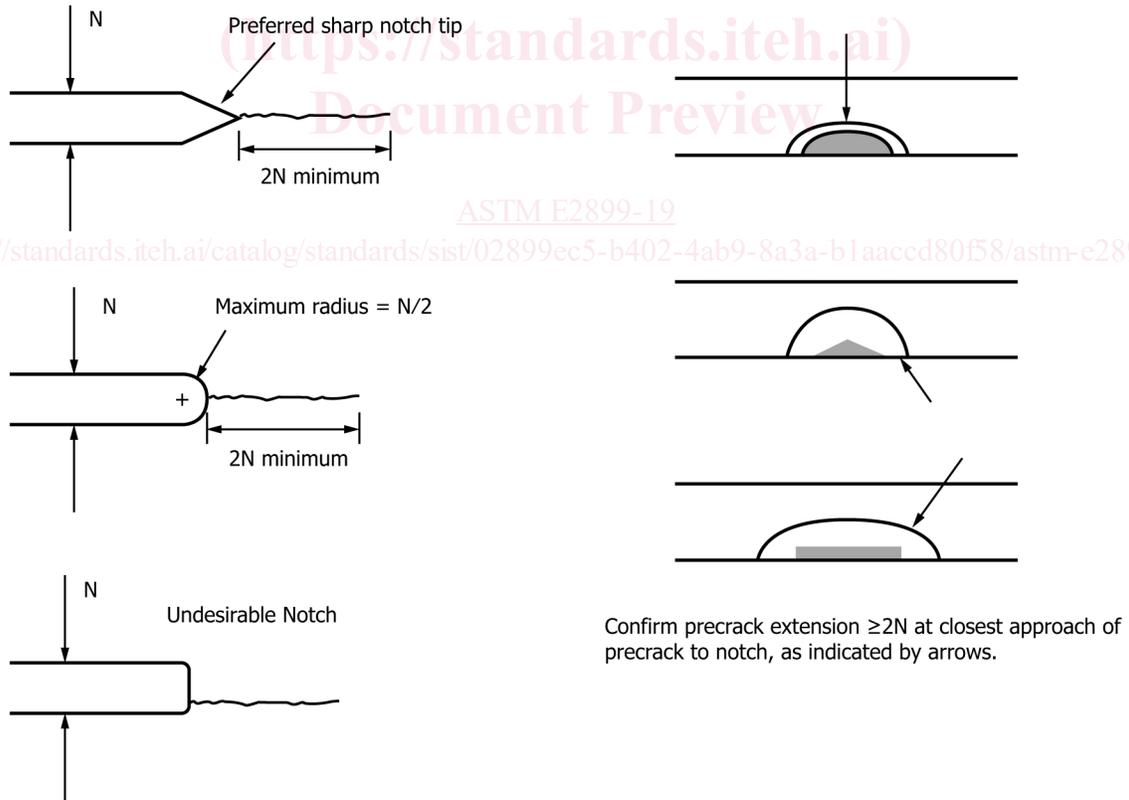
Fatigue Crack Starter Notch Configuration
